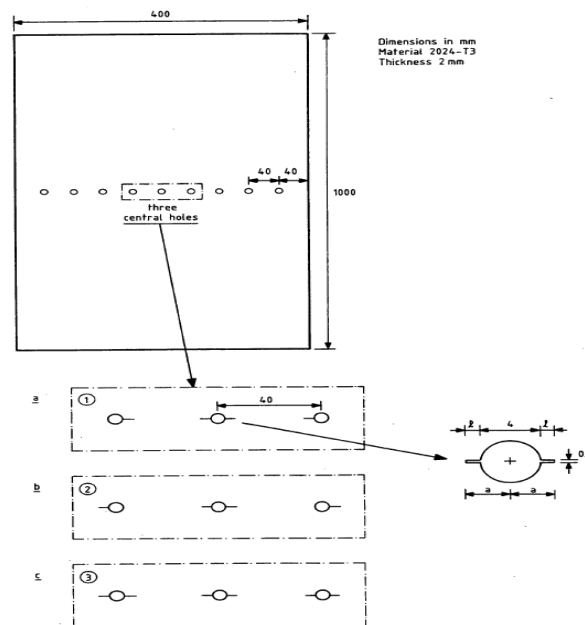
Sheet specimen with row of collinear cracks. Three configurations of crack starter notches at three central holes.
